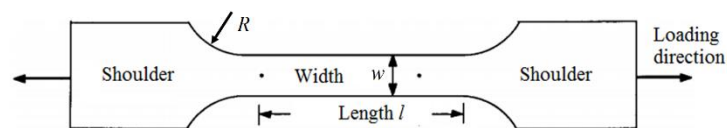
Typical tensile specimen, showing a reduced gage section and enlarged shoulders.
